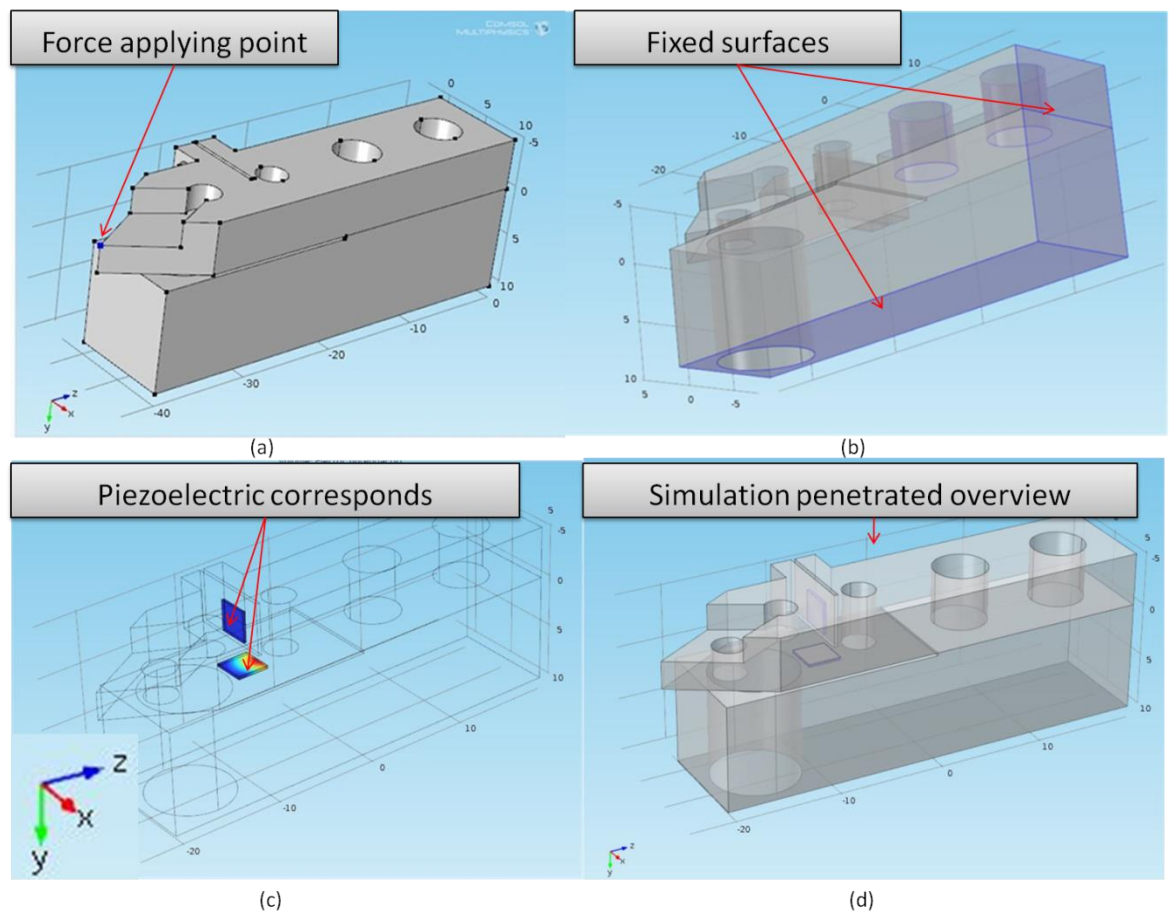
3D illustration of the smart cutting tool mechanical design. (a) Force load point (b) Fixed surface; (c) Piezoelectric ceramic demonstration; (d) Overview of the tool
